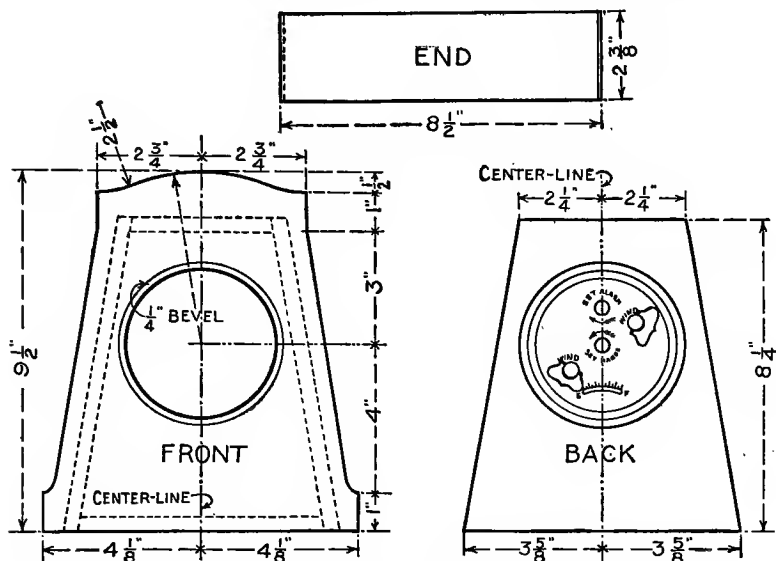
Details of Mantel Clock Shown in Fig. 220.
